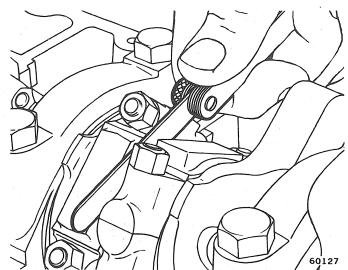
B-131 Connecting Rod Side Clearance Measurement
